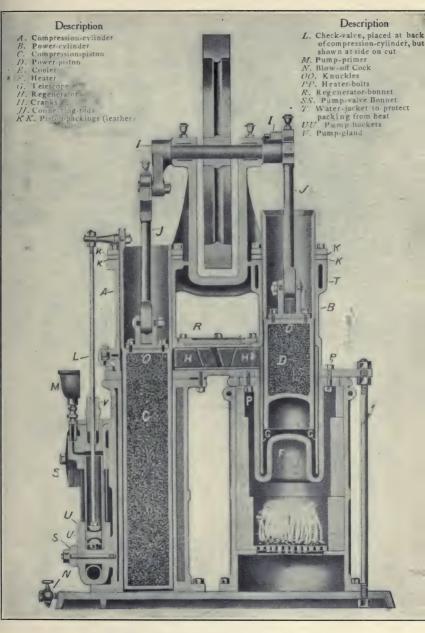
SECTIONAL VIEW OF RIDER ENGINE.
